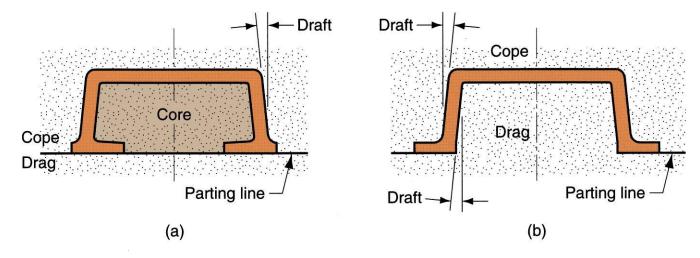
Design change to eliminate the need for using a core: (a) original design, and (b) redesign.
